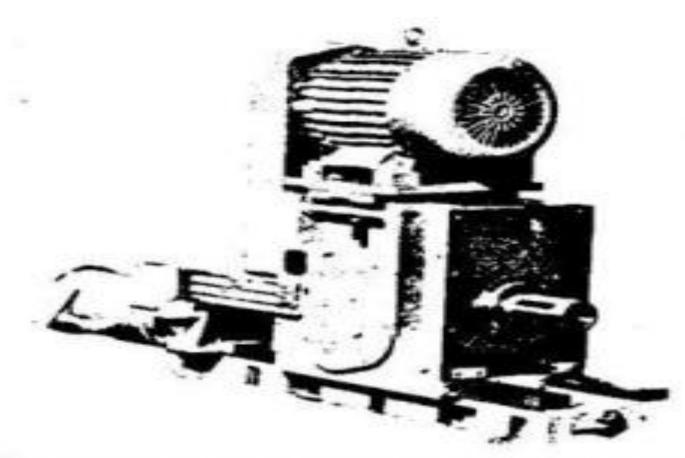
Standard power feed unit used on machining transfer lines. (Courtesy of Ferguson Machine Co.)
